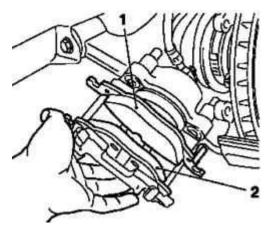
Removing the brake pad linings: 1 - the inner lining of the pad, 2 - outer lining brake pad
